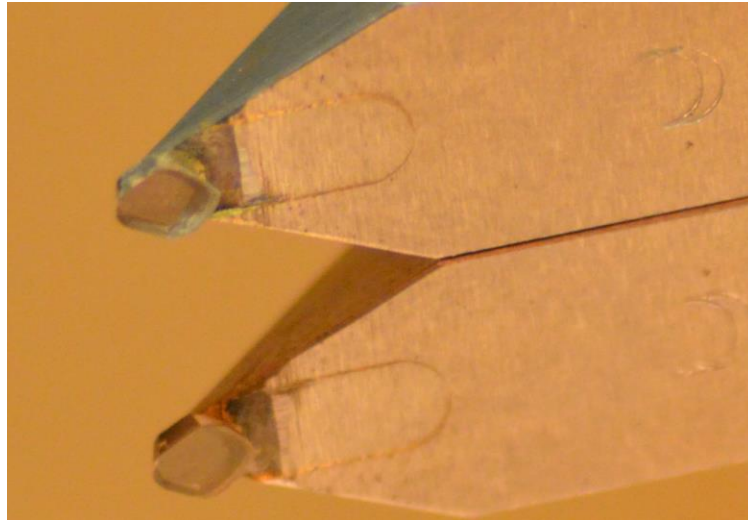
Surface of copper workpiece obtained after CMP. Photograph of a single crystal diamond cutting tool (top) and its reflection on the polished surface (bottom).
